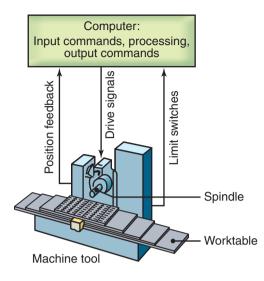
Schematic illustration of the major components for position control on a numerical-control machine tool.
